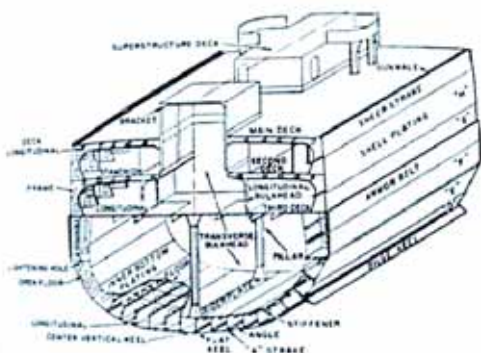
A ship's deck is strengthened by transverse beams and longitudinal girders. This is the hull structure of a cruiser.
